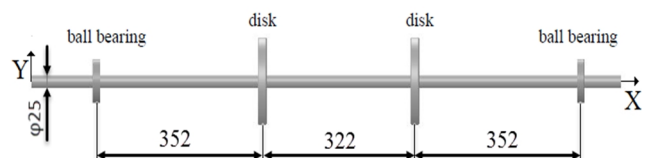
A schematic view of studied rotating system (all dimensions in mm)
